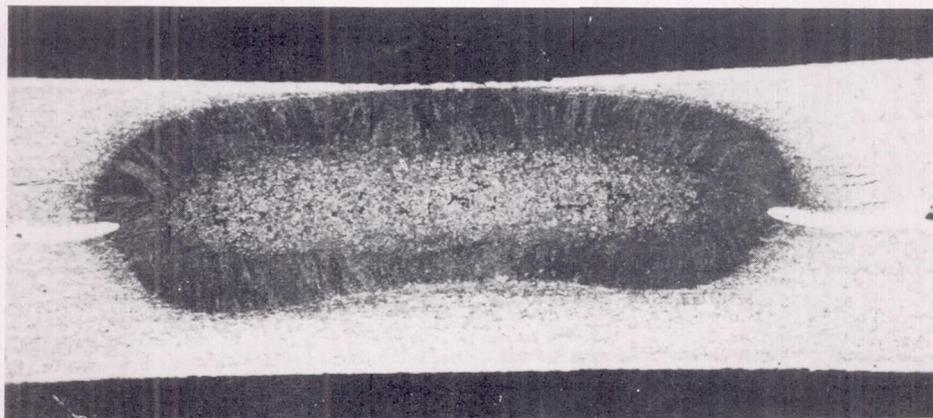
Sample 9C, alclad 24S-T3, welded under conditions to produce a sound weld after wire-brush preparation. Nugget penetrated entirely to the cladding, X20. Keller's etch, .20 seconds.
